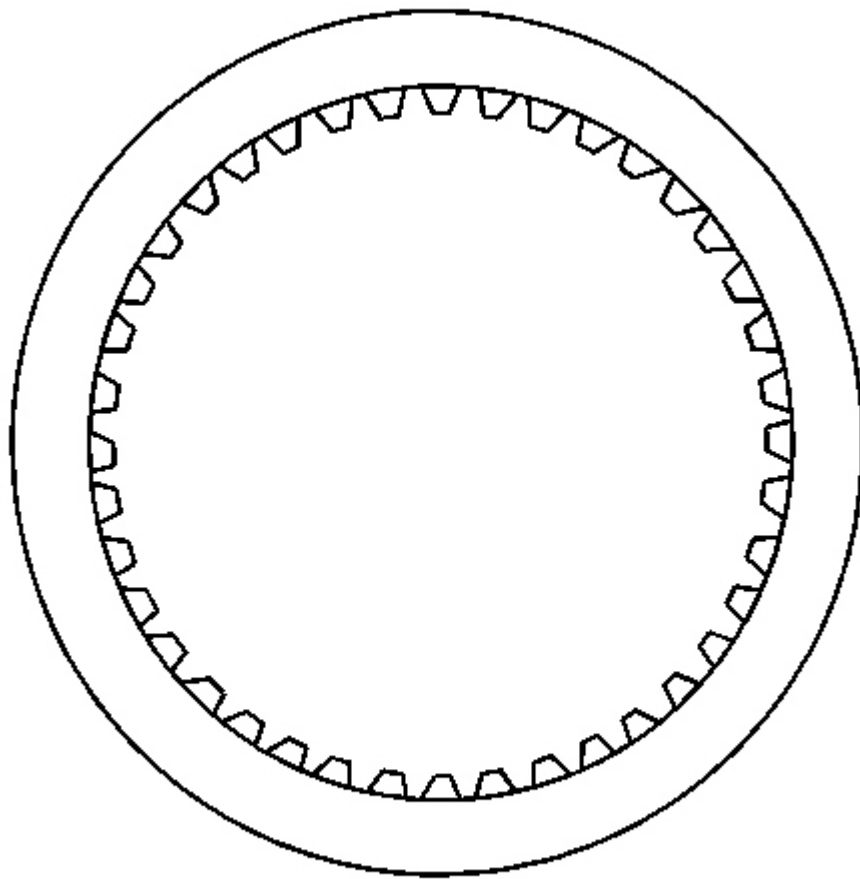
Checking Forward/Reverse Clutch Disc, Plate & Flange For Damage
